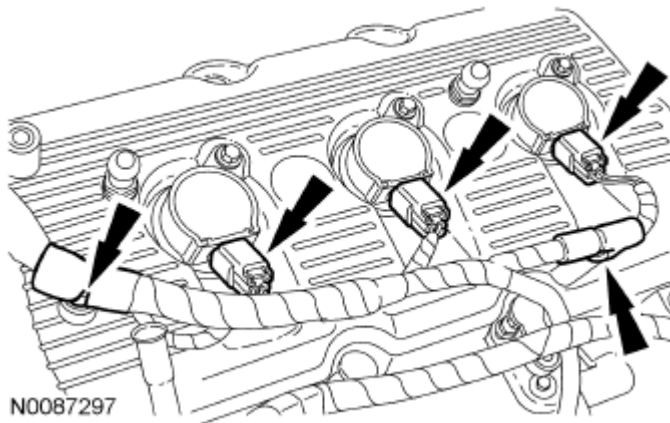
Locating LH Coil-On-Plug Electrical Connectors
